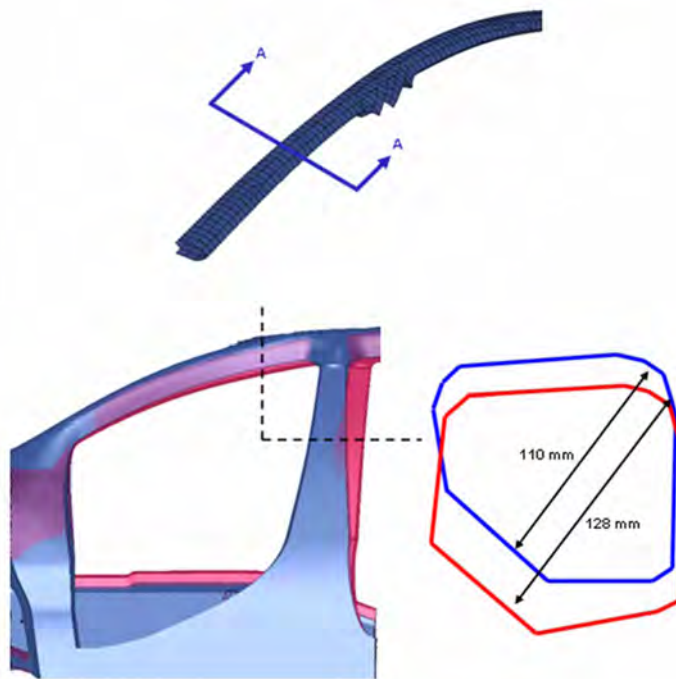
Roof bow final shape (red) overlapped with baseline (blue)-(top view)
